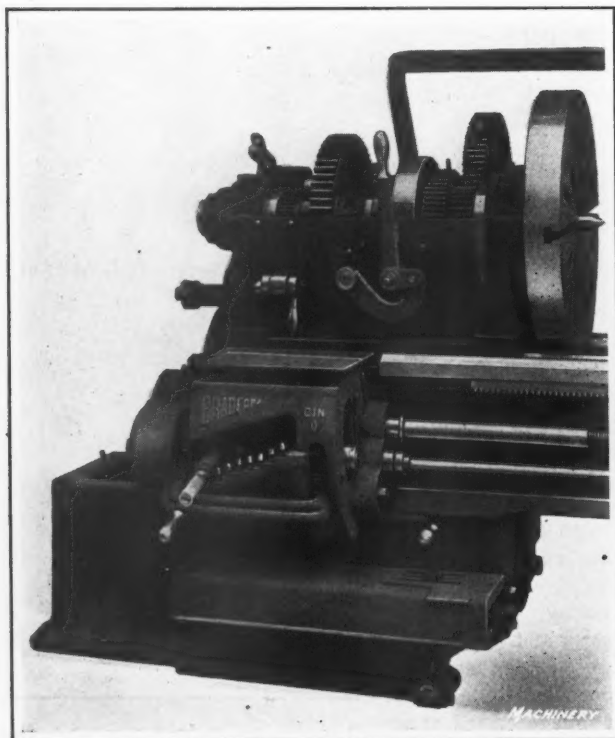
Head End of Bradford Geared-head Lathe with Gear Guards removed
